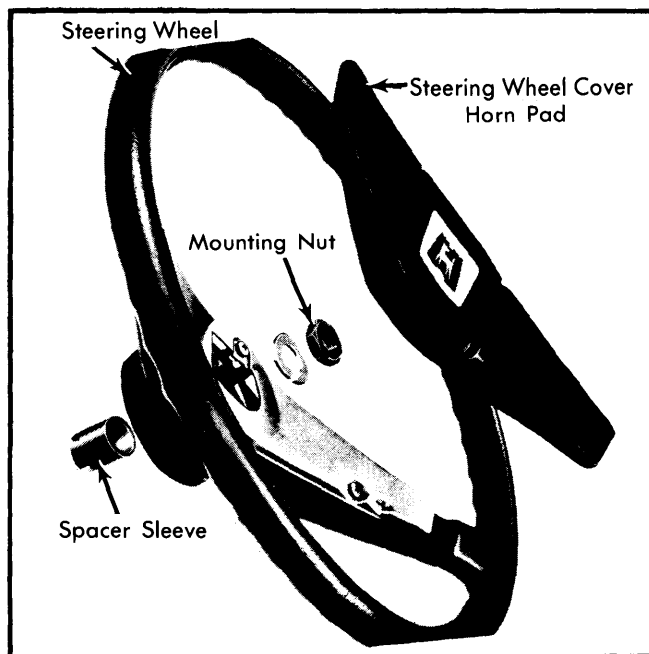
Typical Volkswagen Steering Wheel Rabbit and Scirocco Shown
